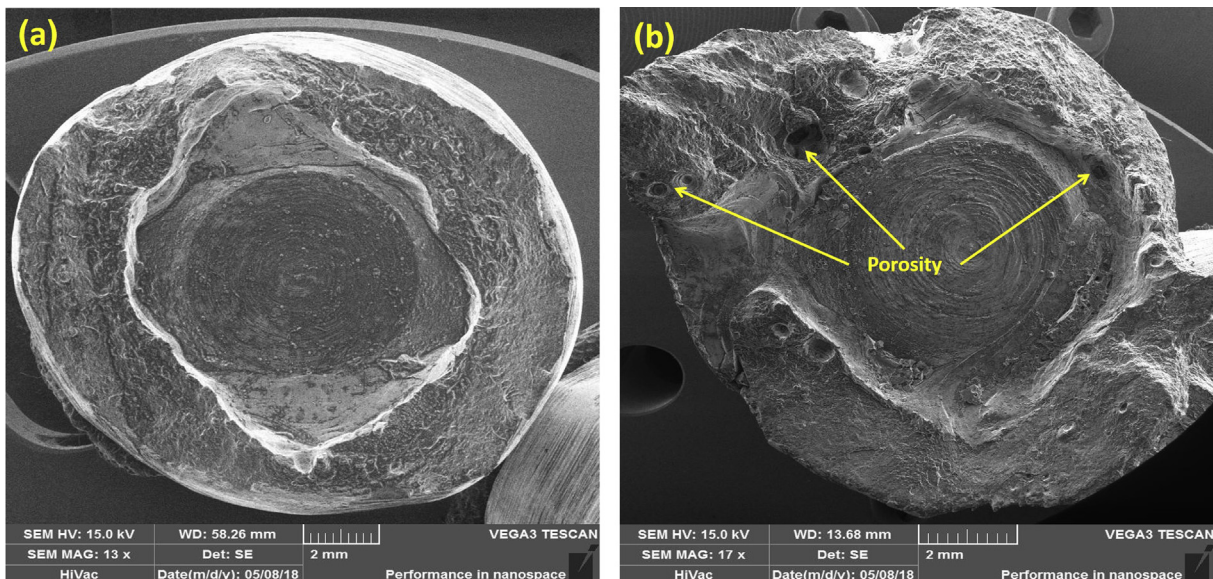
Fracture surface of tensile test for (a) air weld, (b) underwater weld.
